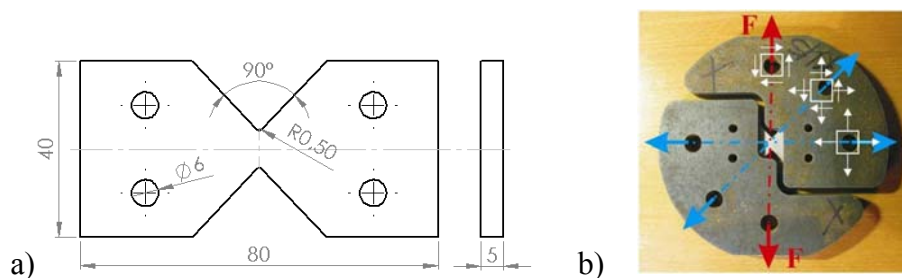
a) Testing specimen, b) Clamping appliance for shear test
